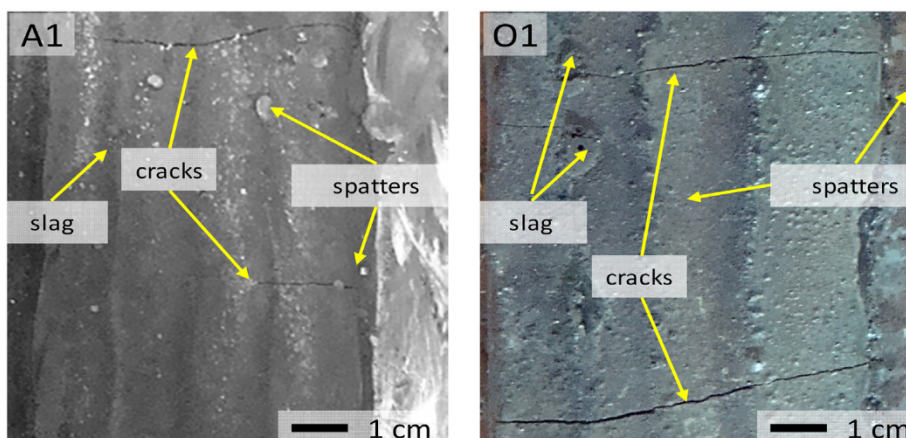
Top view of welded coupons A1 and O1.
